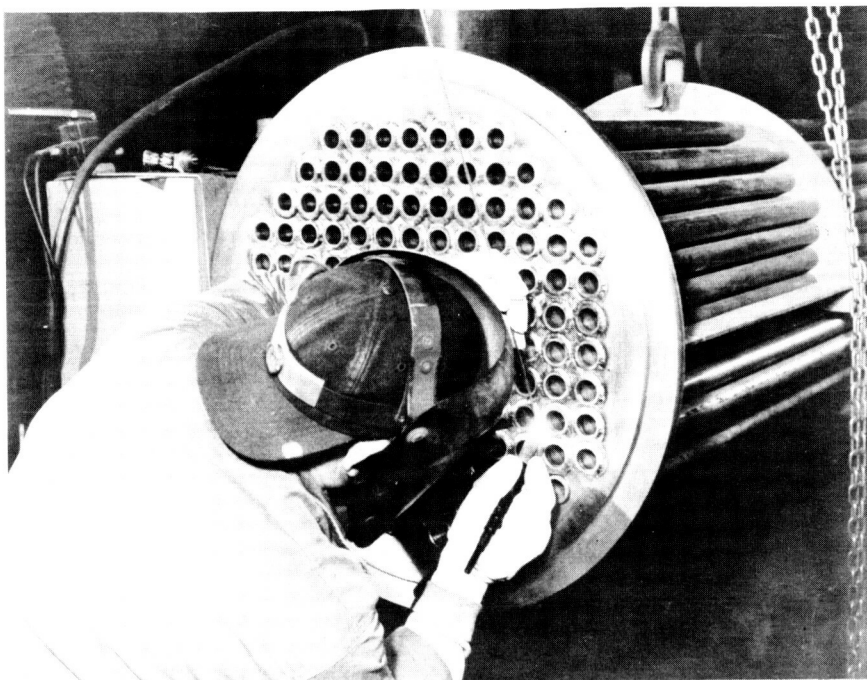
MANUAL GAS TUNGSTEN-ARC WELDING OF TUBE-TO-HEADER JOINTS IN INCONEL 600 (REF. 44)
